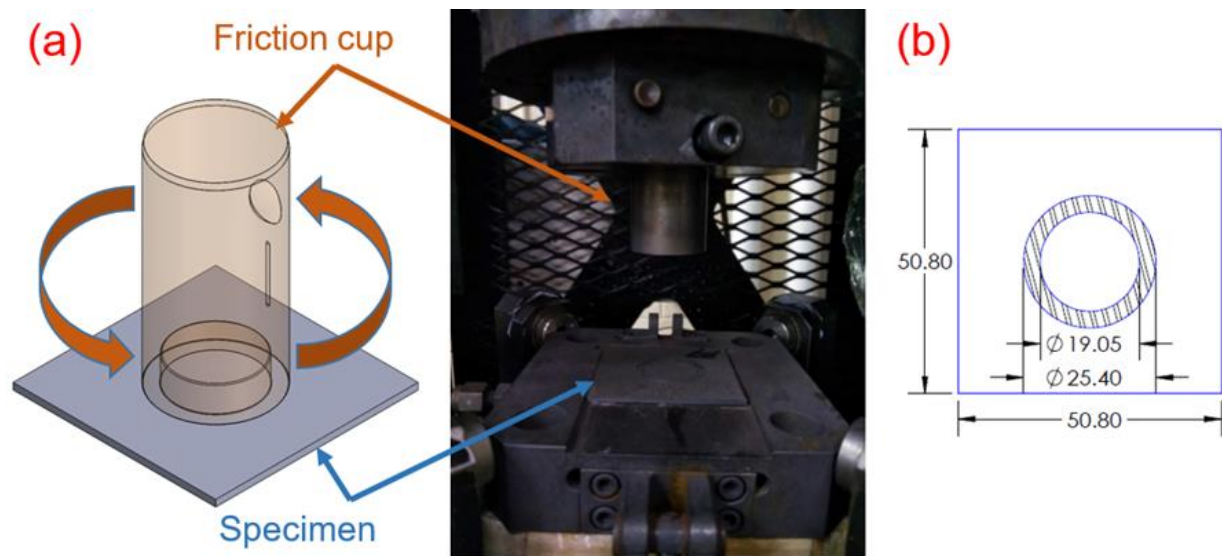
(a) Rotating friction cup made of Uddeholm Dievar hot work tool steel. The PHS1800 test specimen is located below on a stationary holder. (b) The concentric contact profile of the friction cup has an outer diameter of 25.4 mm, and an inner diameter of 19.05 mm. Contact occurs on a square and flat test specimen.
